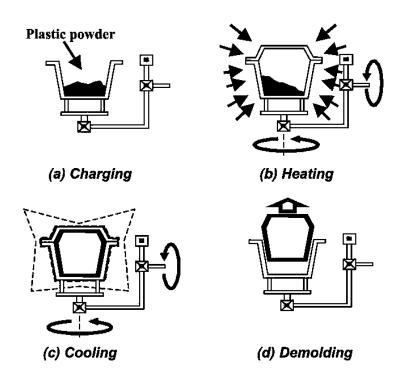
Rotational molding manufacturing process (Beall 1998).
